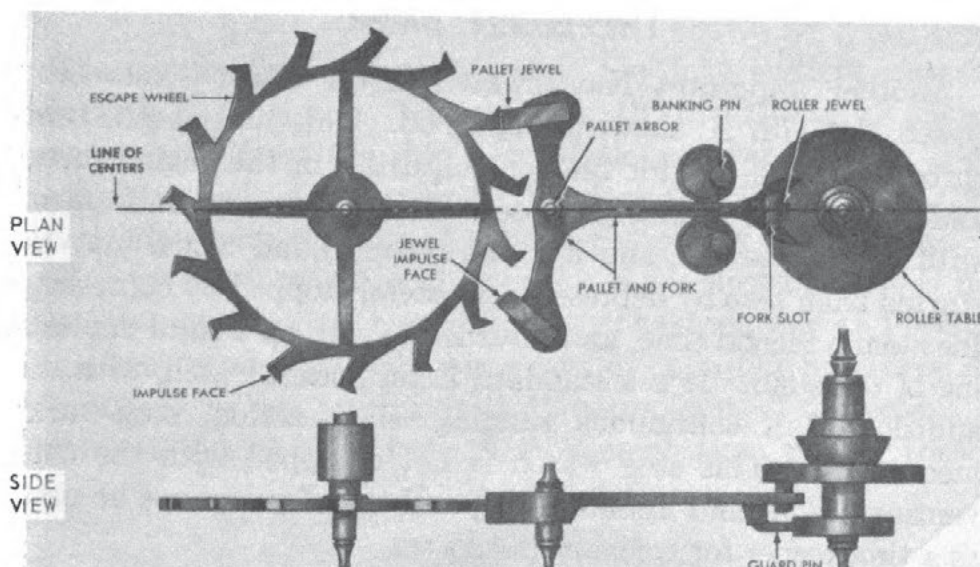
Relative positions of escape wheel, pallet and roller assembly parts.
